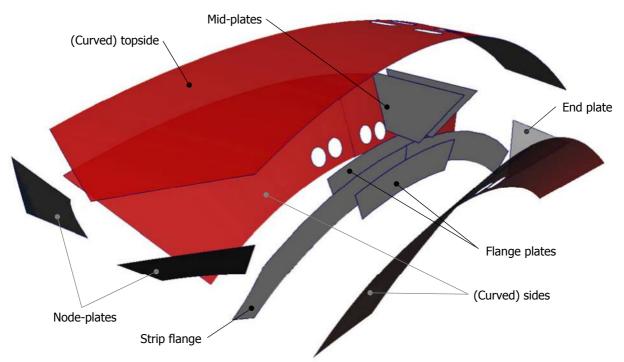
Naming of the elements in an exploded view of a rib from prototype 2.
